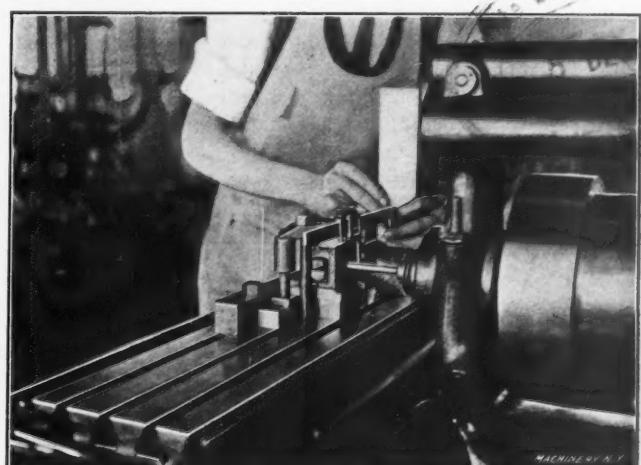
One Method of Setting the Work—Making a Horizontal Adjustment
